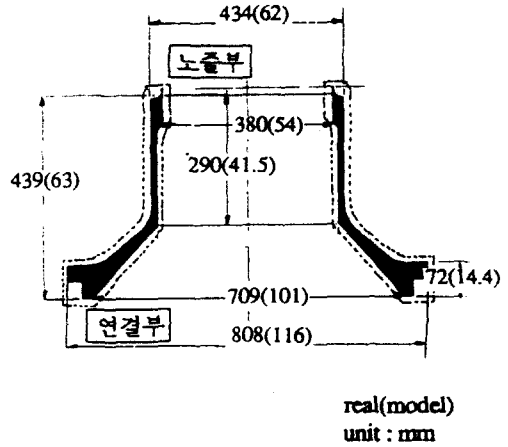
Schematic drawing of converged nozzle shaped forging and dimensions
